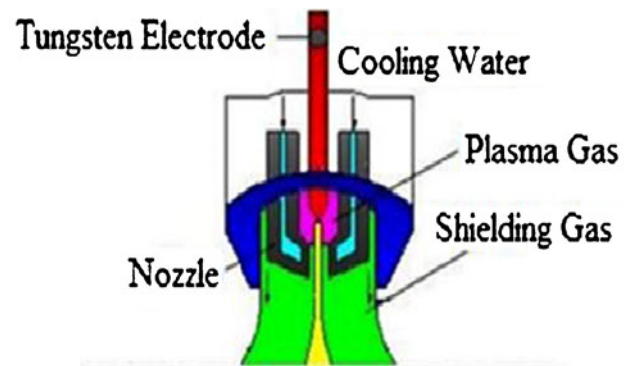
The operating principle of keyhole plasma transferred arc welding process
